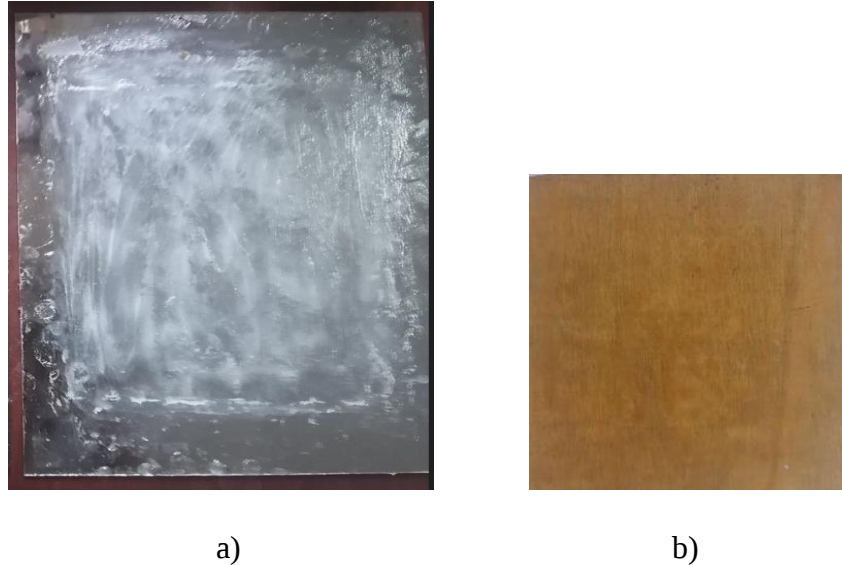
Upper molds: a) for mold-1, b) for mold-2.
